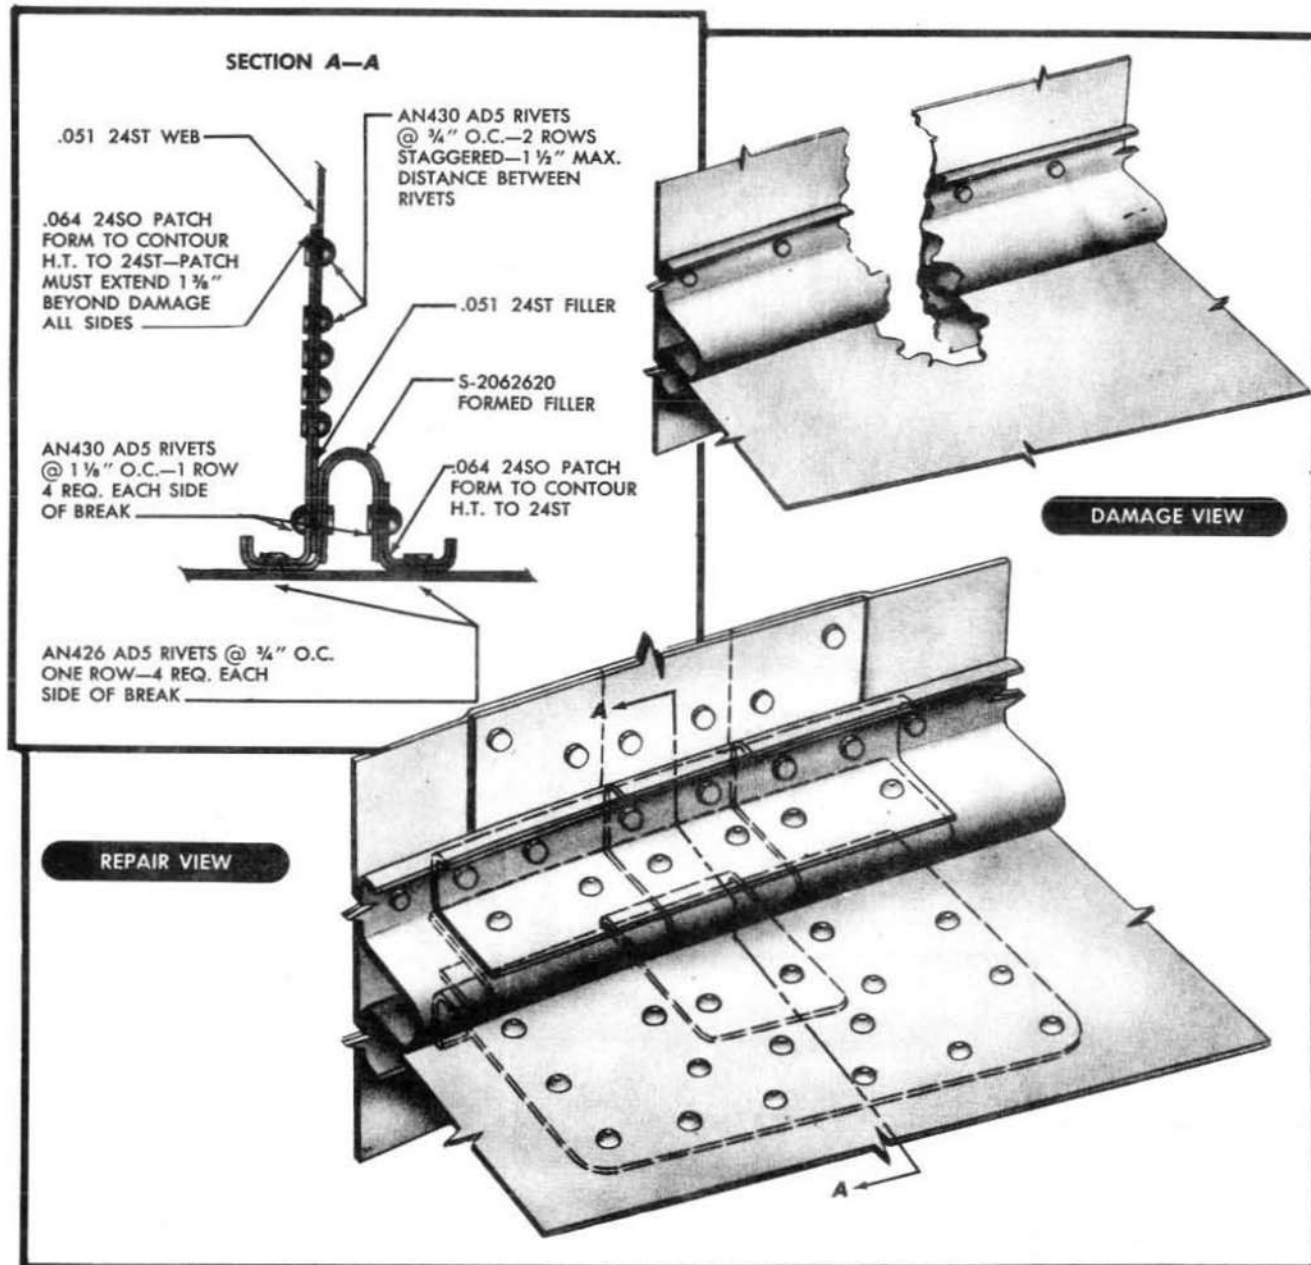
Key Drawing of Damages to Wing Center Section Rib — Sta. 32
